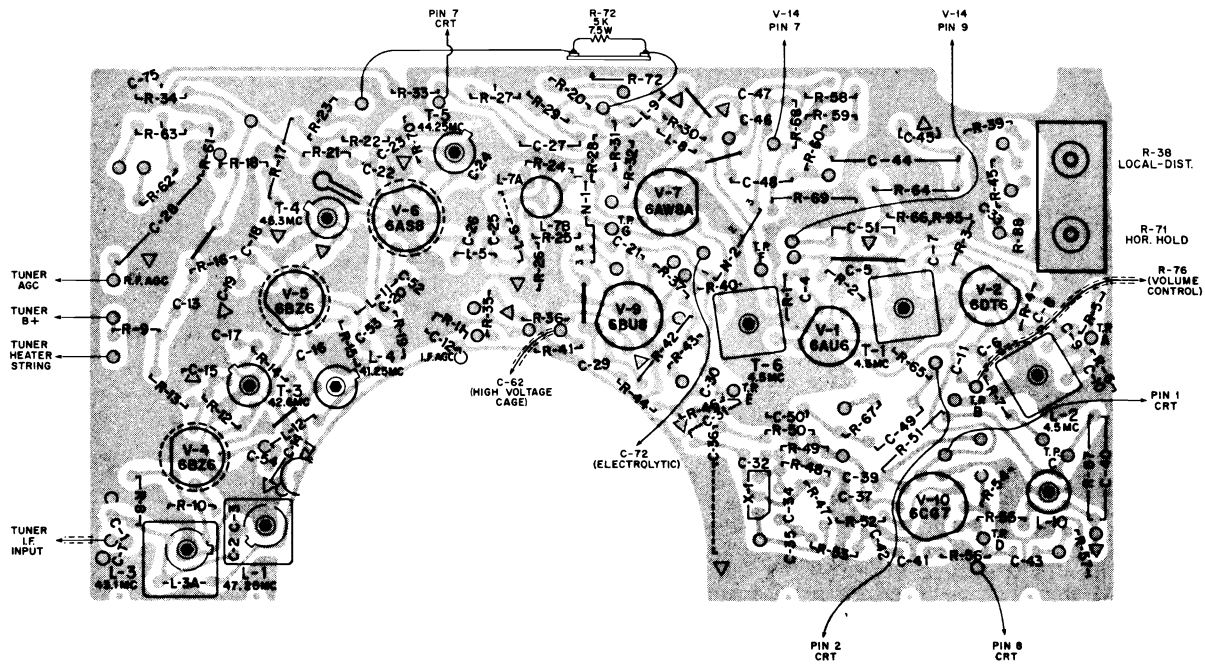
ETCHED PRINTED CIRCUIT BOARD, TOP VIEW
